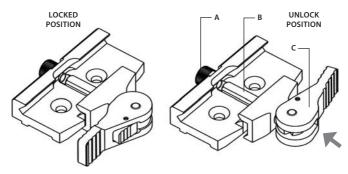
MOUNT. UNDERSIDE VIEW
